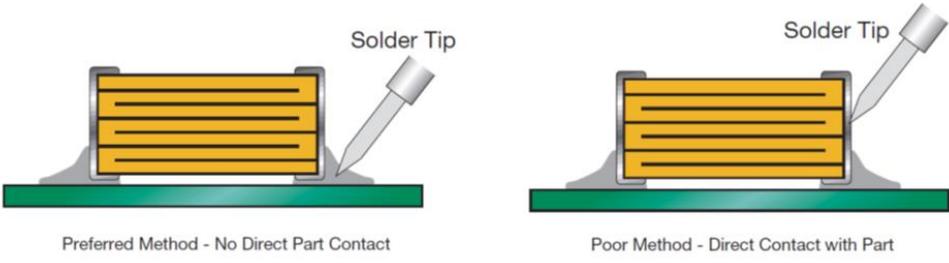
Reworking by hot solder tip, source: AVX mounting guide
